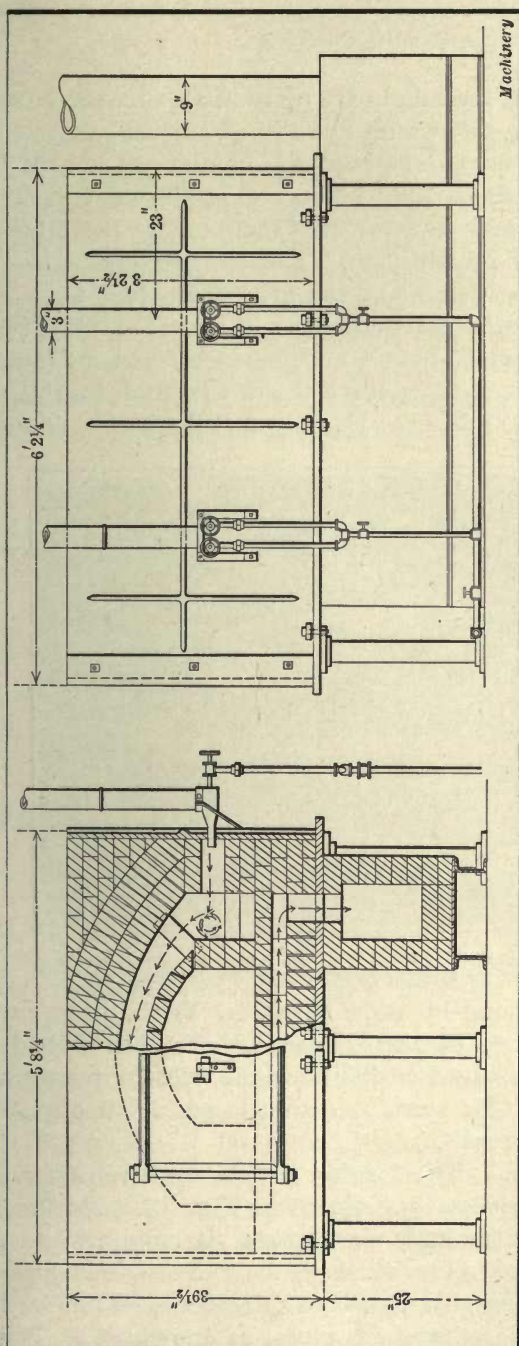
Furnace built by the Laconia Car Co., for heating High-explosive Shell Blanks for Forging
